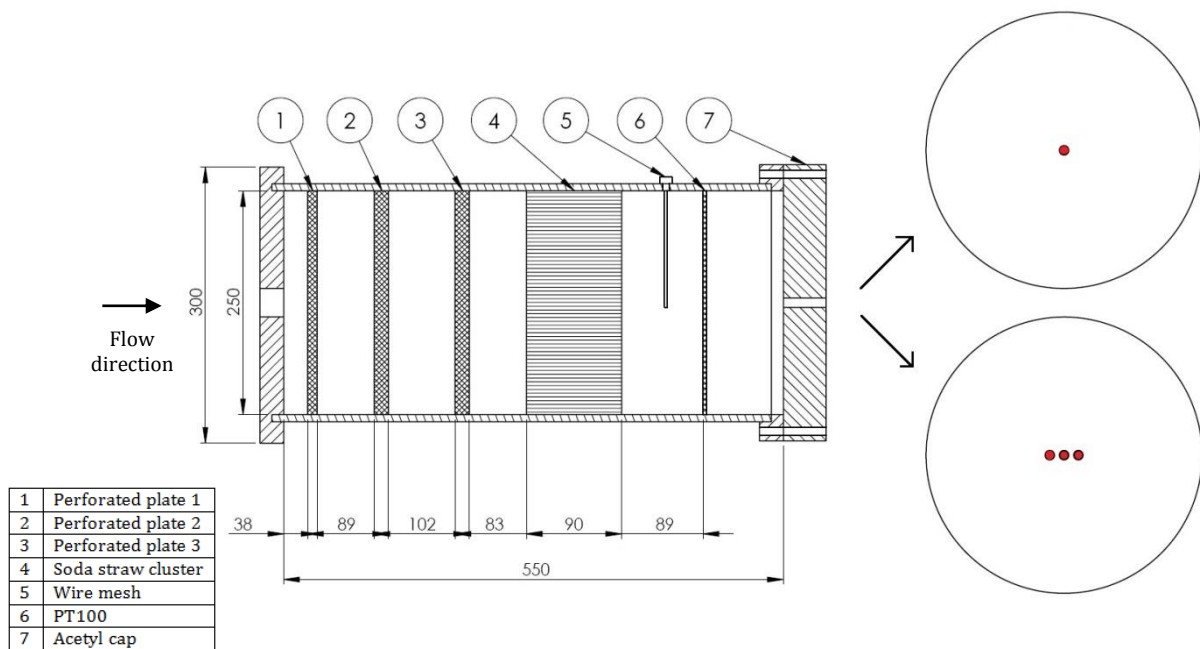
Cross-sectional view of the calming section showing all the inserts and the acetyl caps for both test sections (single-tube and triple-tube test sections). All dimensions in mm.
